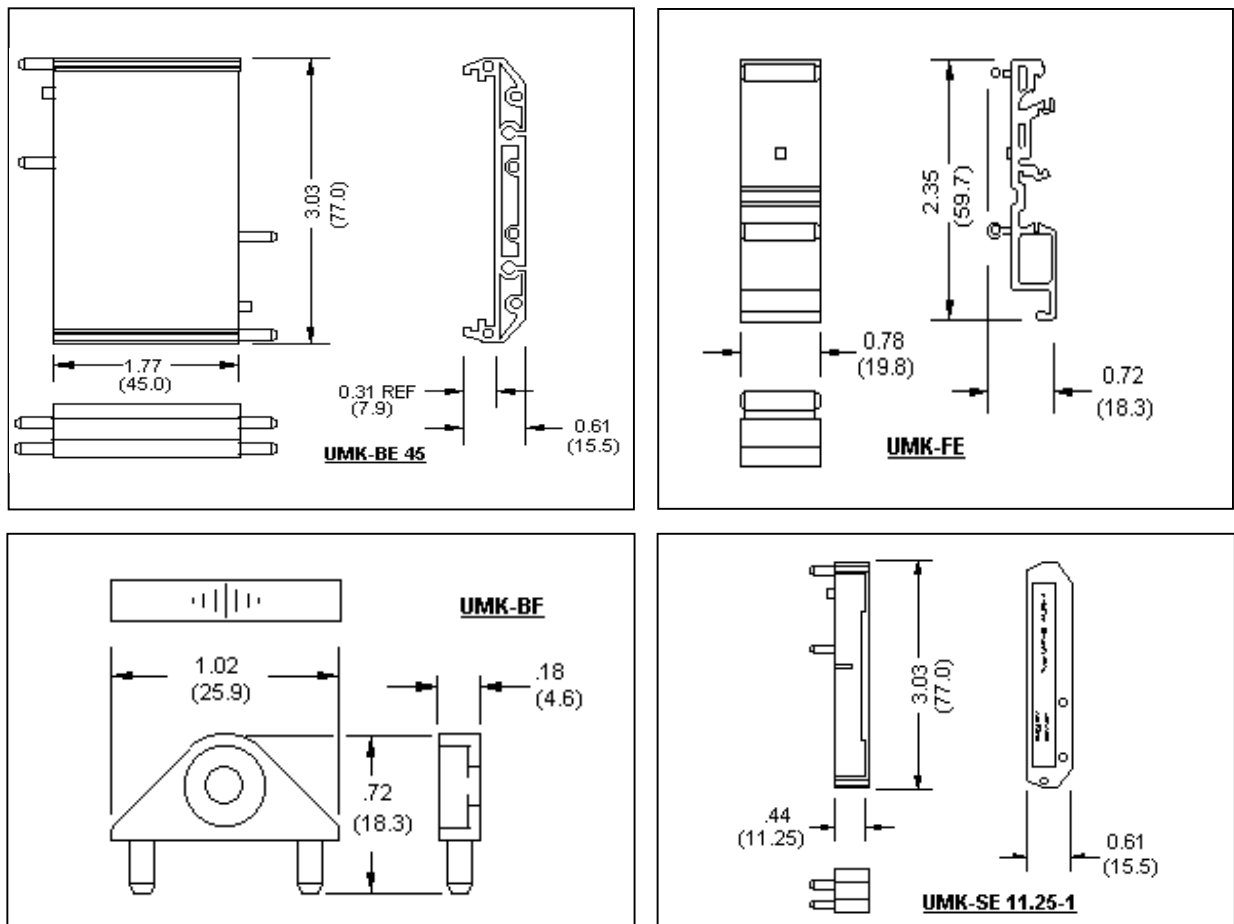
Terminal Board Mounting Base Assembly Drawings
